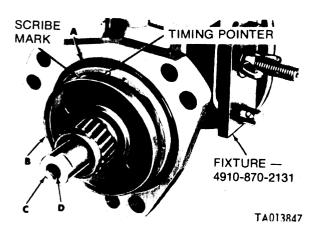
Installing timing device hub on camshaft. NOTE
